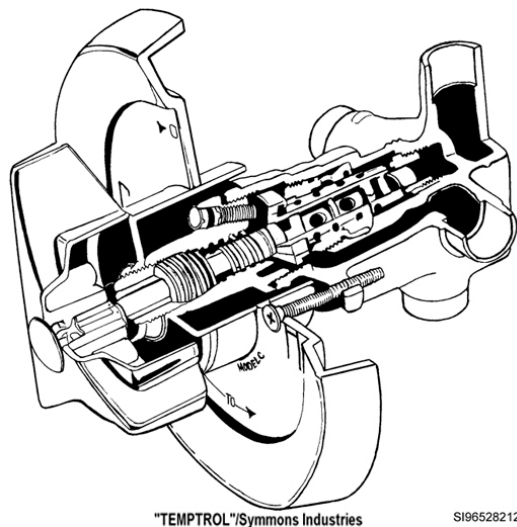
Cutaway view of a pressure-balancing shower valve.
